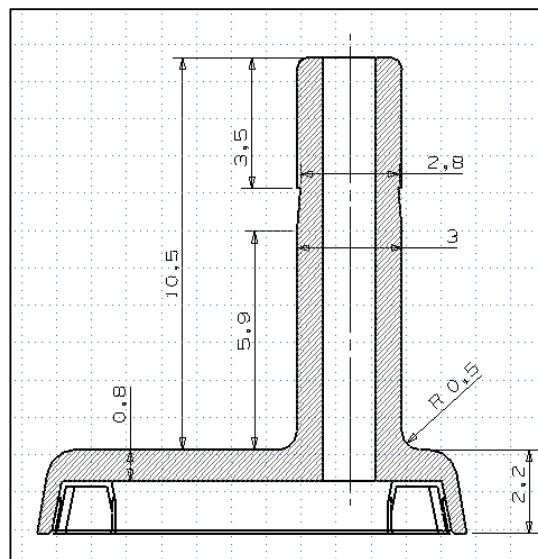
Mechanical drawing: Section A Figure 11.4 of tube connection (type B)
